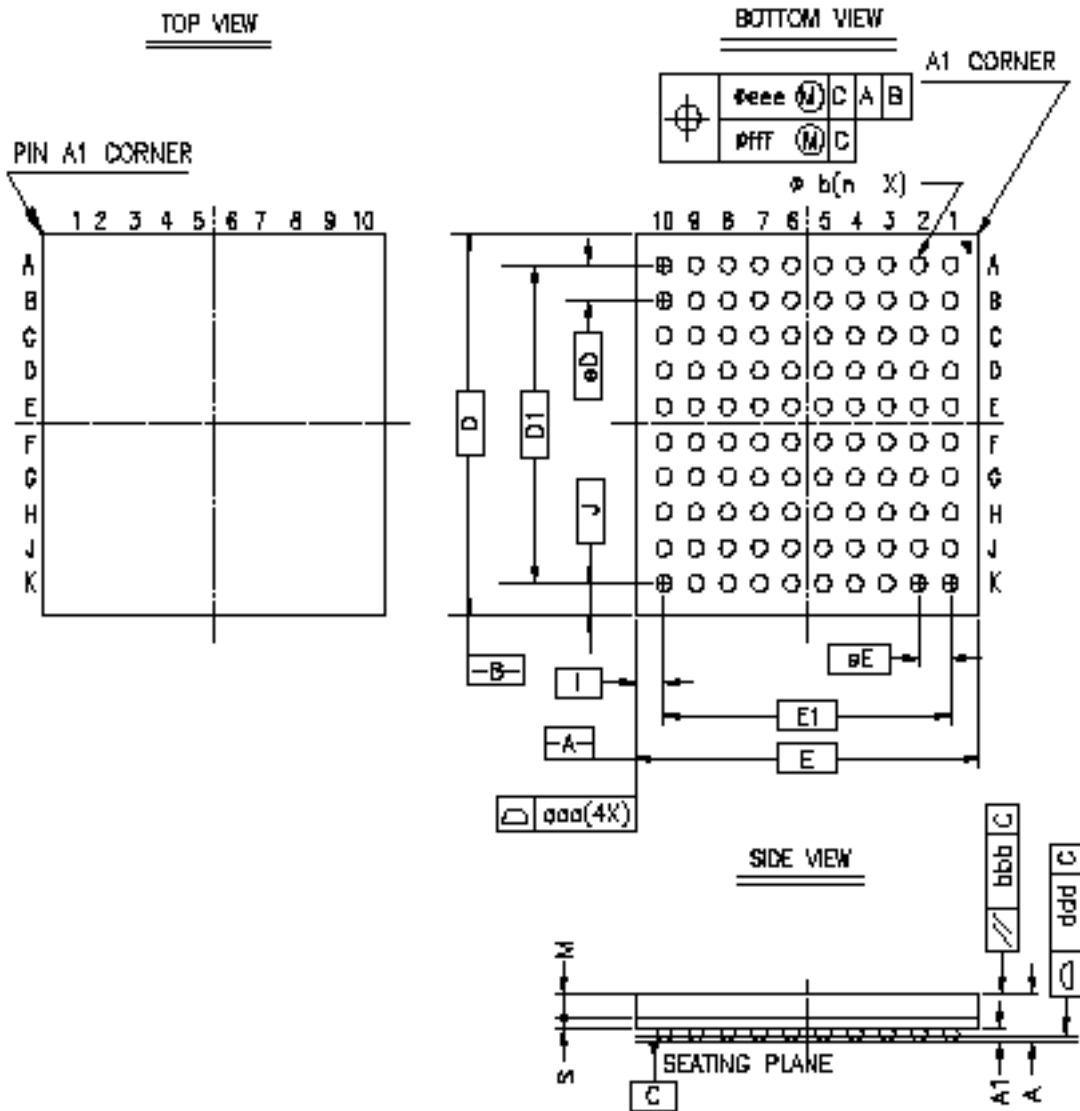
100-ball TFBGA Package Mechanical Drawing
